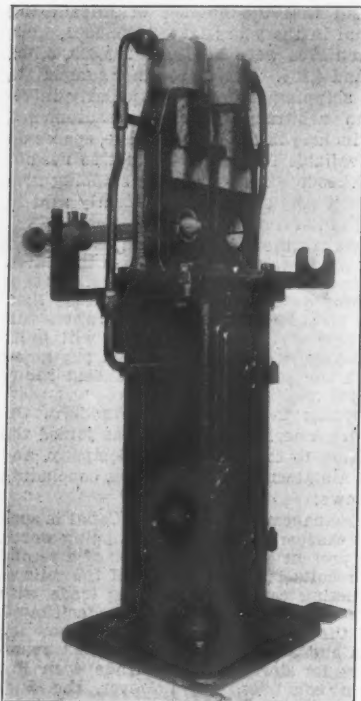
McGrath Double-Cylinder Flue-Welder.
